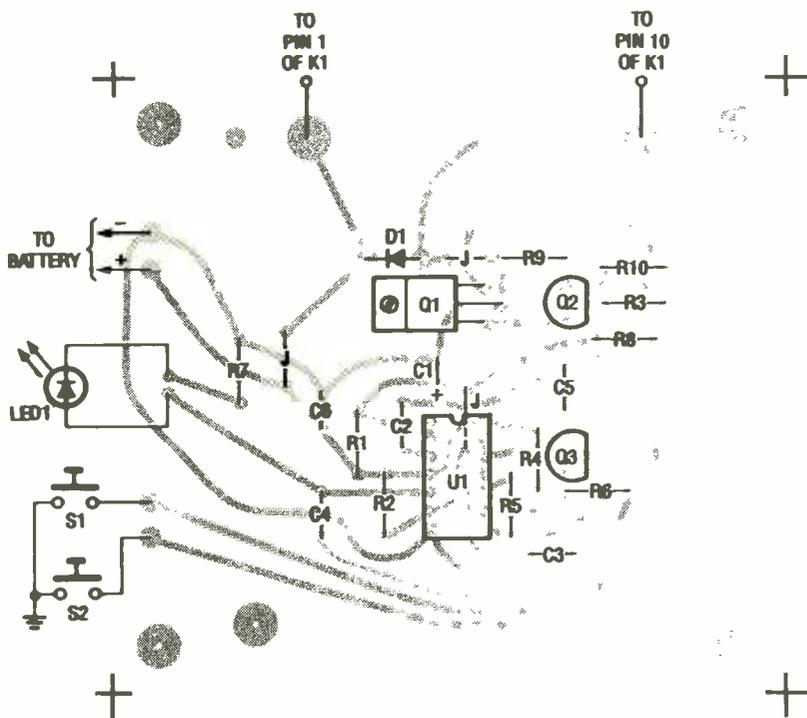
When assembling the printed-circuit board, it is necessary to use low-profile parts so that the circuit board can be fitted inside the relay socket.
